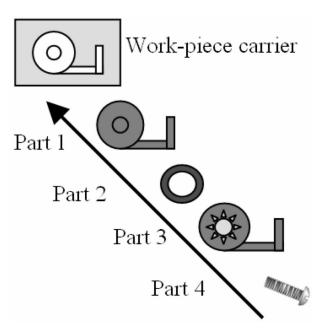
Adhesive Tape Roller Assembly and Kitting Process [Frei 2008].
